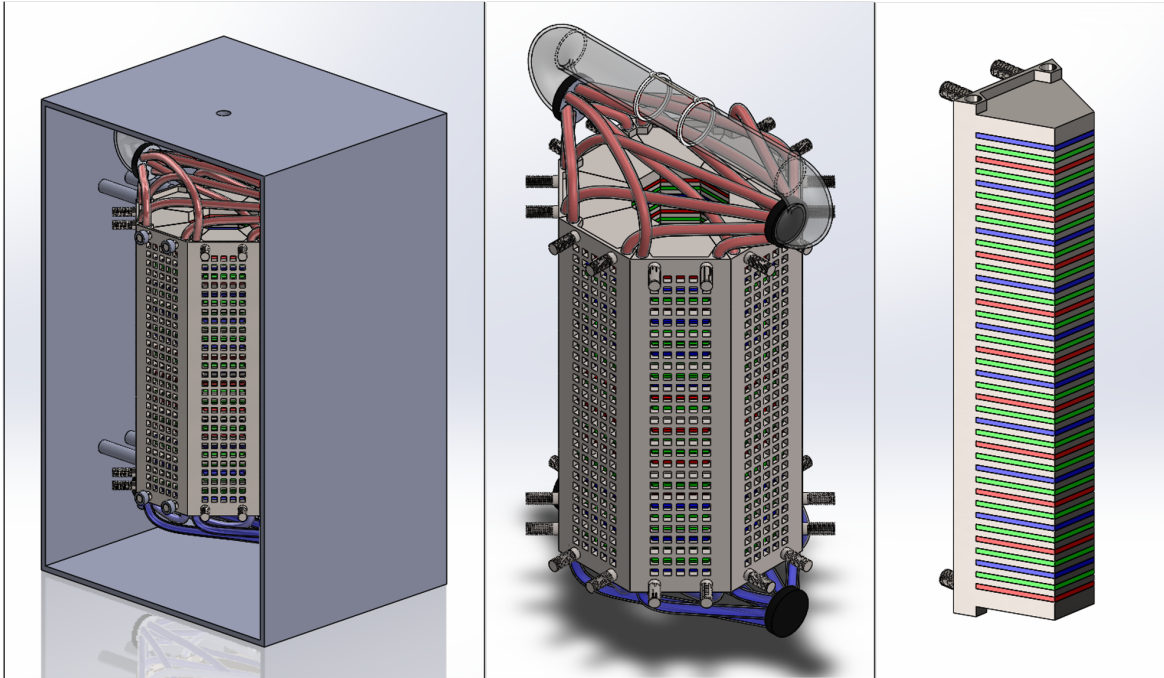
BAM sorption pump rendering of octagonal sorption pump inside its protective casing (left), sorption pump outside its protective casing with heating assembly on top and cooling assembly on bottom (middle), and one of eight identical wedges with zeolite layers shown in green, heating layers shown in red, and cooling layers shown in blue that form the octagonal sorption pump (right) [128].
